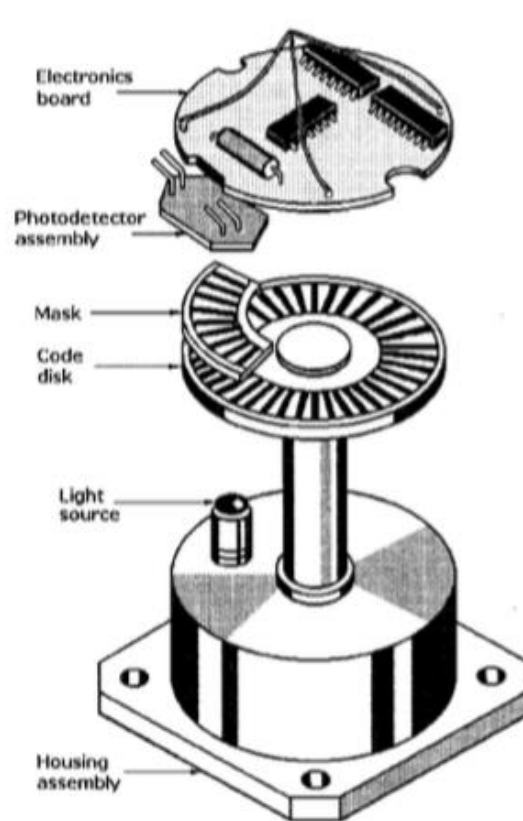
Exploded view of an incremental encoder. Image: Sandin
